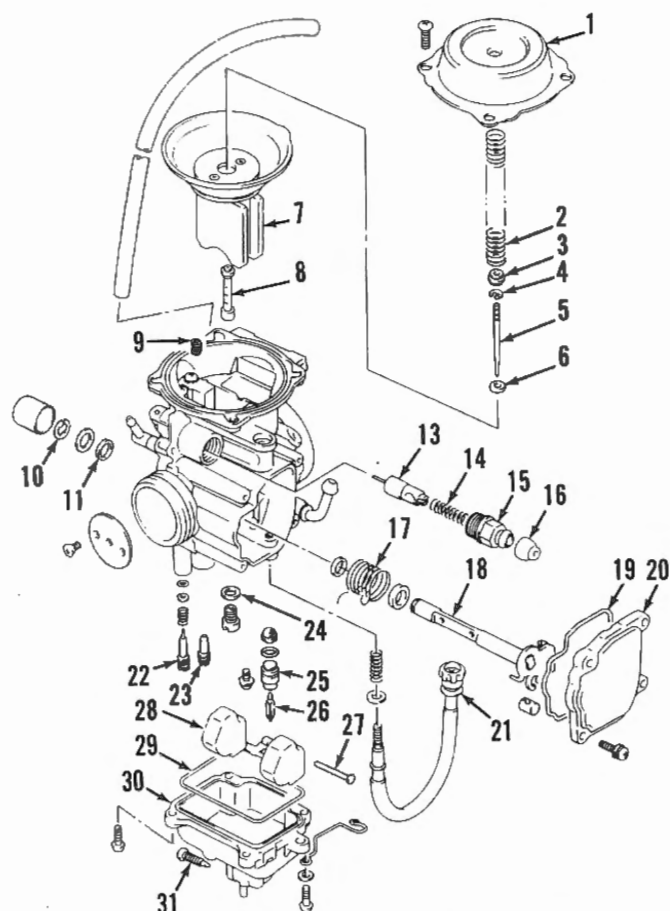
Exploded view of Mikuni BST31SS carburetor.
